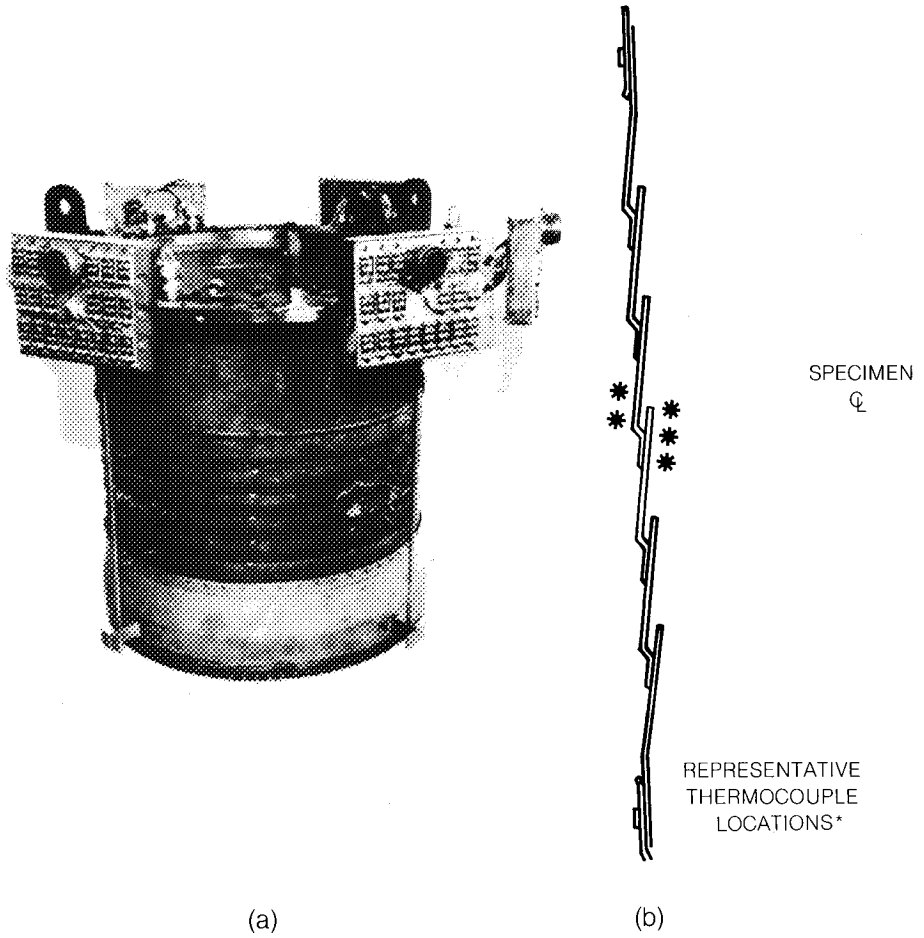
Assembled Liner Test Specimen and Cover (a) and 5-Louver Test Section (b)
